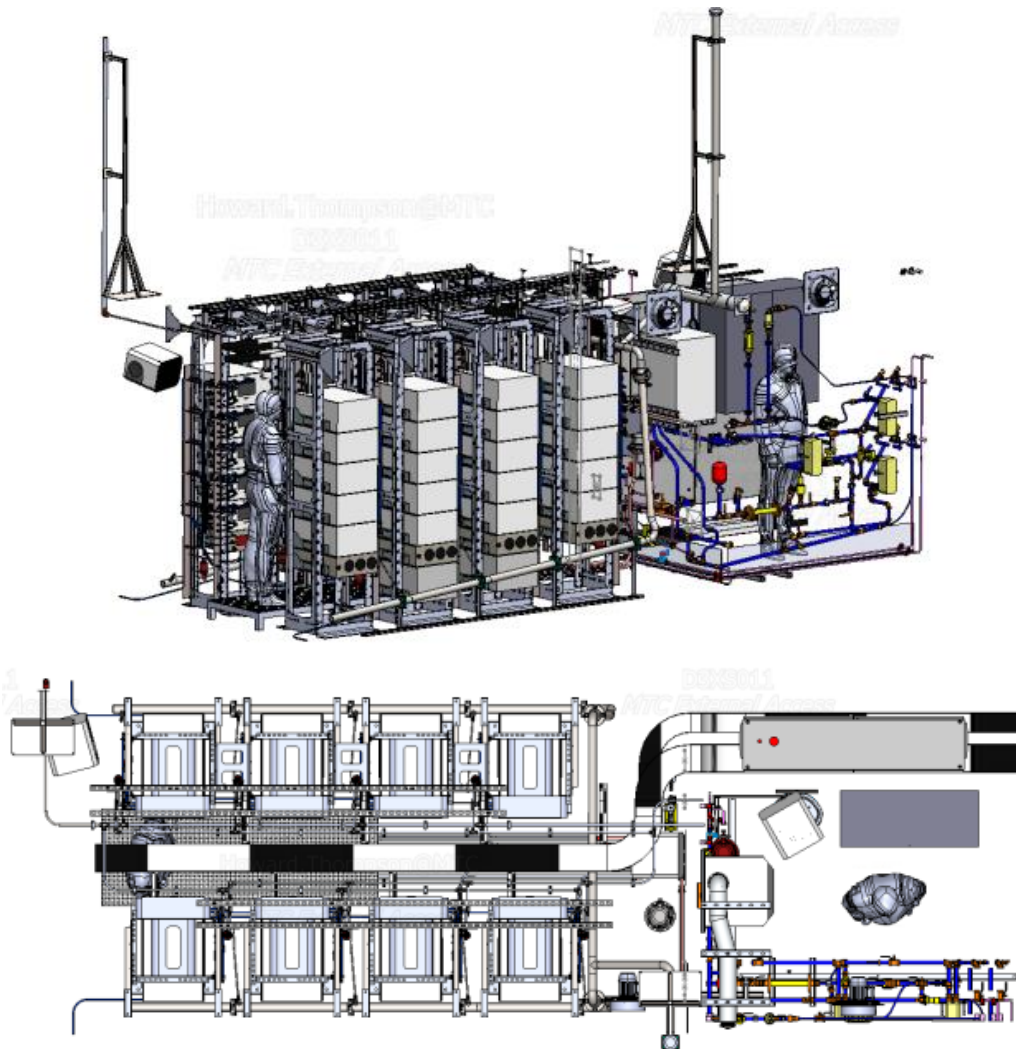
HiAB container internal layout (Top - side view, Bottom - top view)
